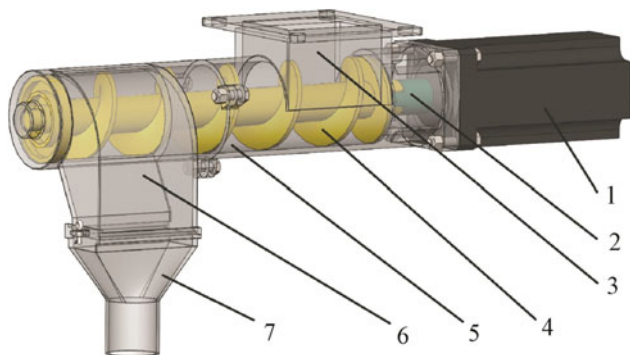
Schematic diagram of a screw fertilizer discharging device: (1) drive motor, (2) coupling, (3) feeding inlet, (4) screw, (5) screw shell, (6) discharge port, (7) concentrator.
